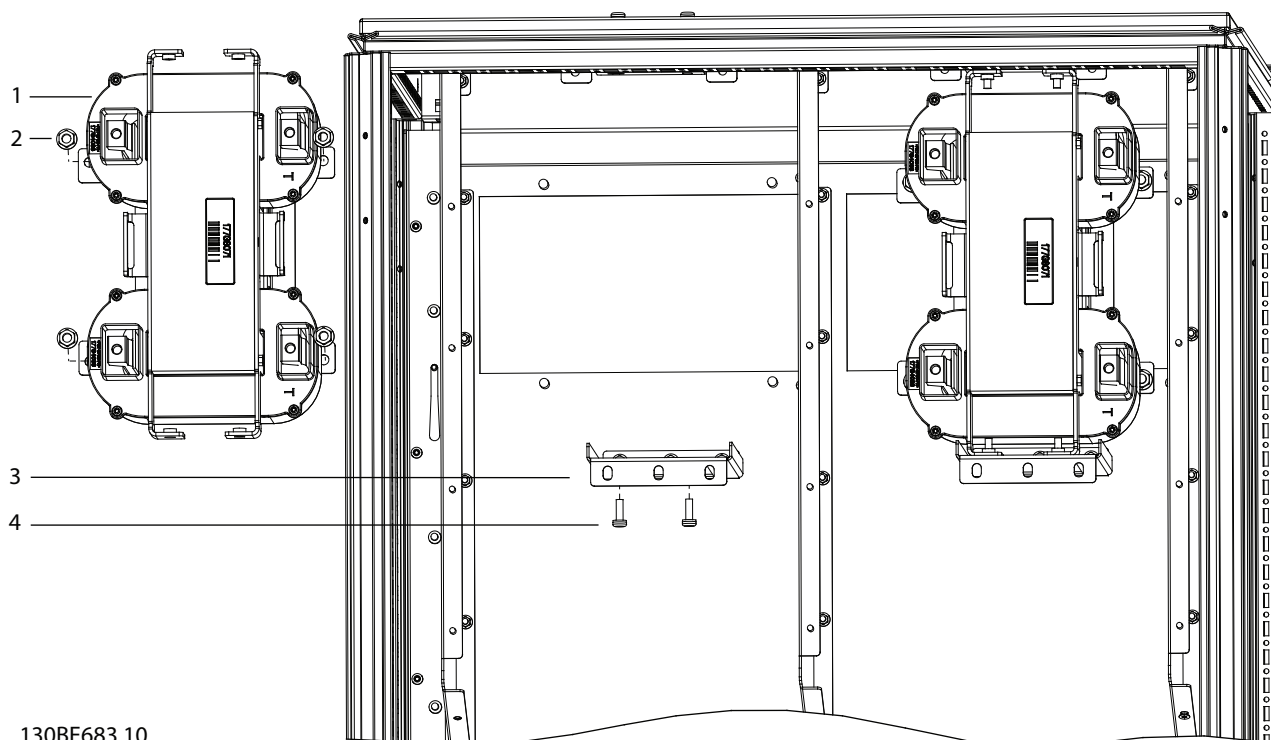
Removing the Inductor Cover and Fan Transformer from the Upper Duct Plate
